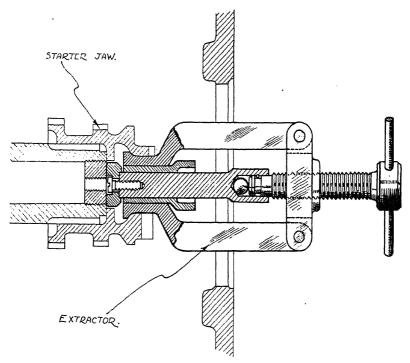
DISMANTLING STARTER JAW FROM REAR END OF CRANKSHAFT TAIL SHAFT.
